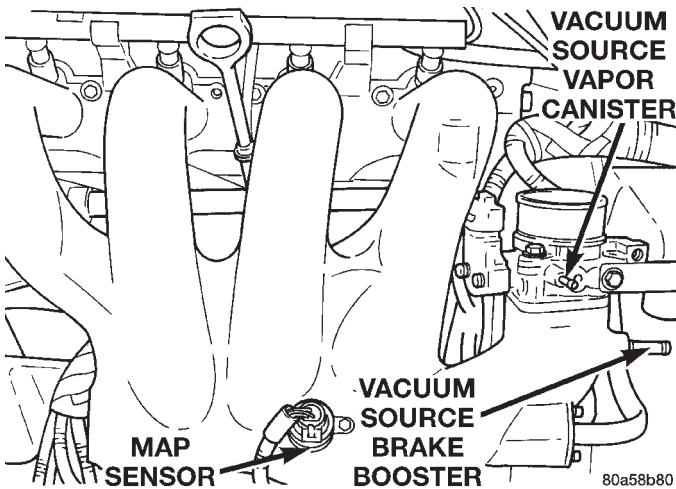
Manifold Absolute Pressure (MAP) Vapor Canister and Brake Booster Hoses
